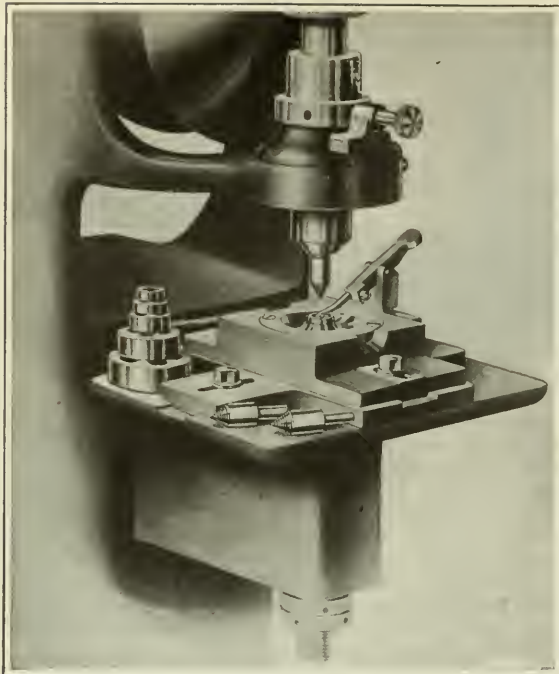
Close View of Anderson Die Muzzling Machine in Operation
